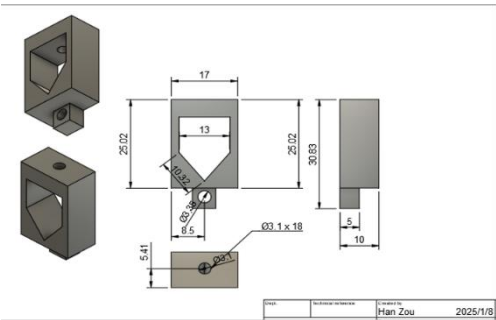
Penholder Design of Robotic Arm Components (all dimensions in mm)
